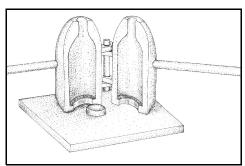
Side-hinge two-piece mold (Lindsey 2012)
